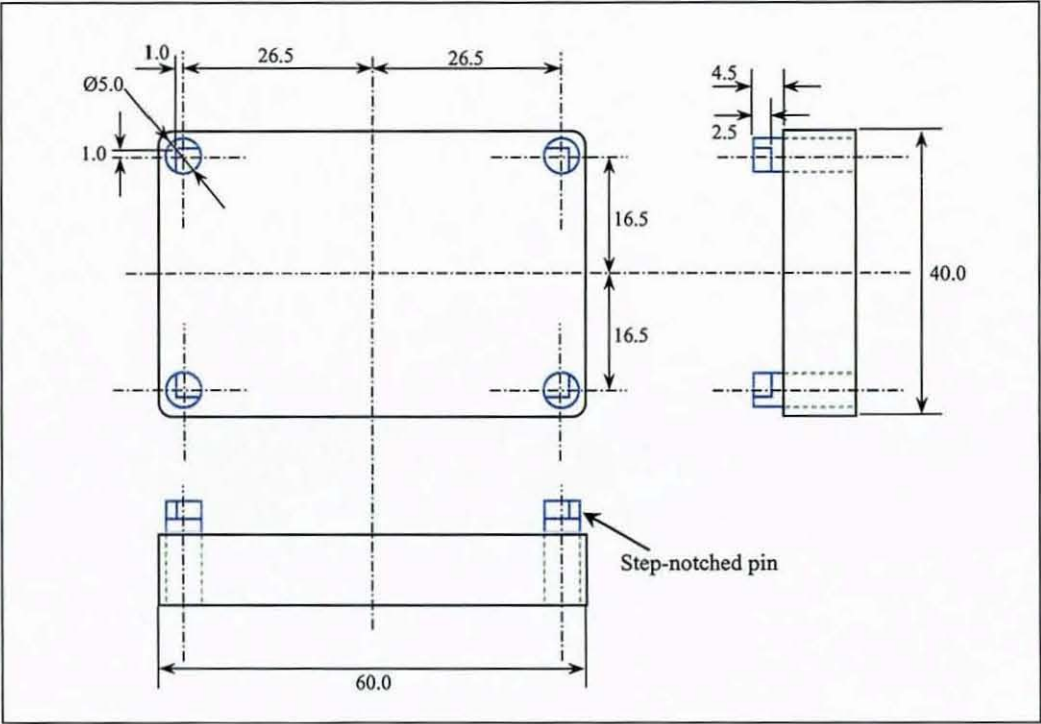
Fixed-half insert of the in-mould supported tool (with step-notched pins)
